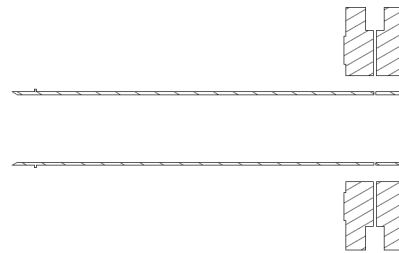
A vertical cut of the measurement flange, showing the division between the combustion air and the cooling air and the holes protruding to the inside of the pipe
